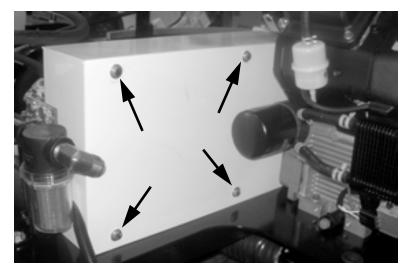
Remove the four screws holding the front of the sprayer pump belt cover.
